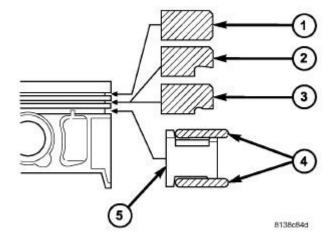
Piston Rings Courtesy of CHRYSLER LLC
